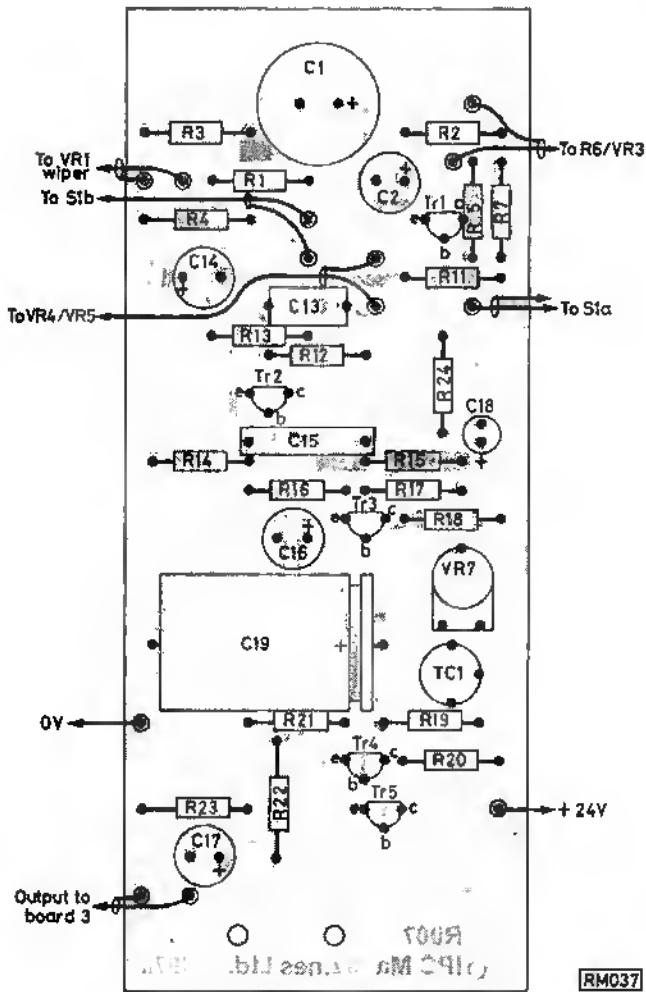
Component placement drawing for the Bridge Circuit p.c.b. (Board 1)
